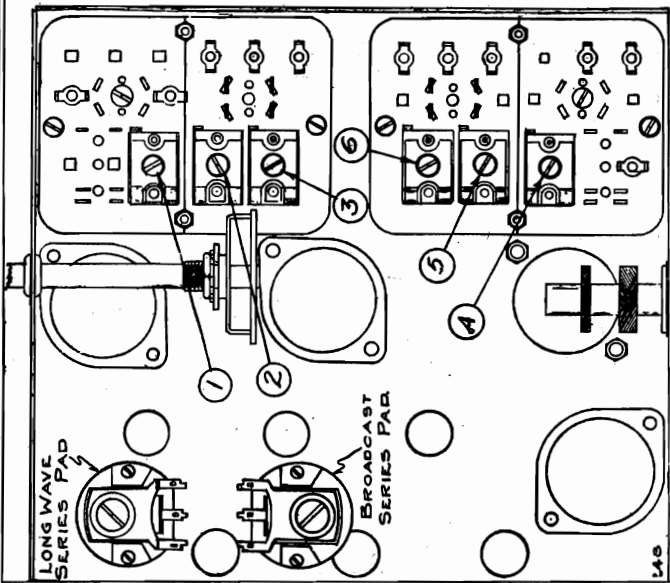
BOTTOM VIEW (Showing Trimmers)
